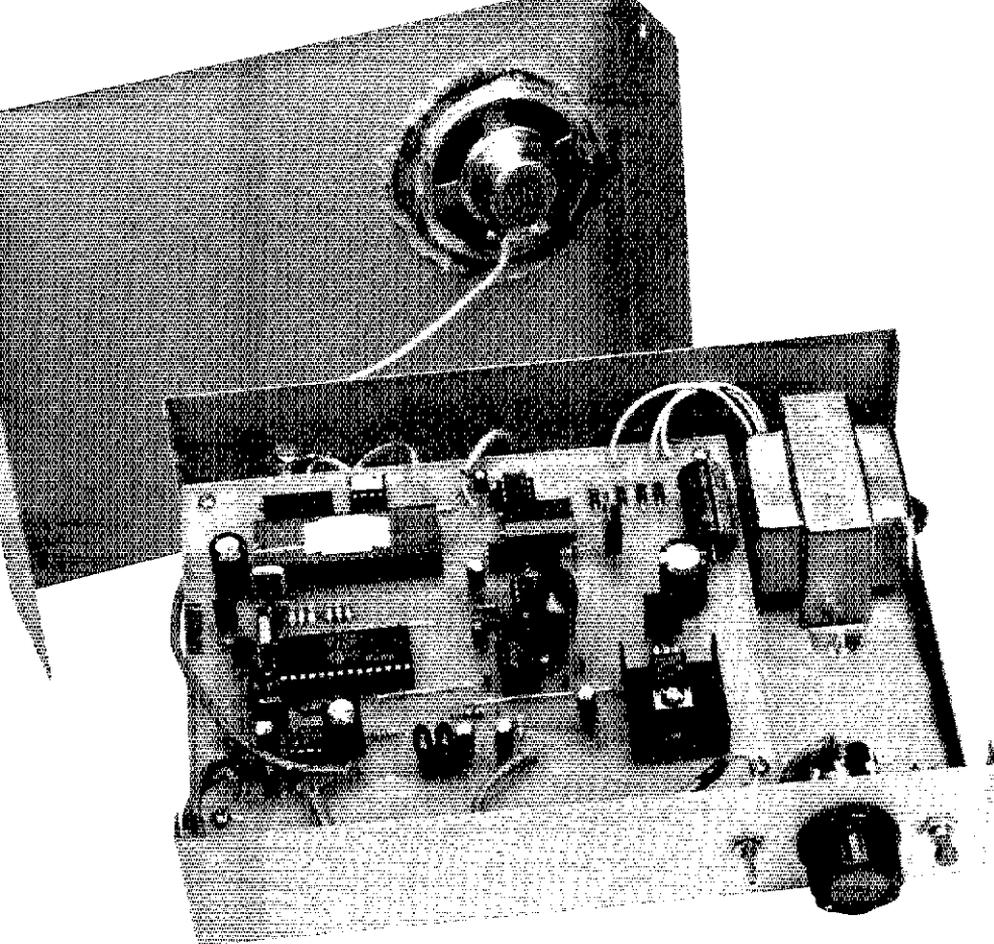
An inside view of the Orator. A Radio Shack enclosure (RS 270-272) houses the components. To avoid having machine-screw heads on the cabinet top, the speaker is held in place by a bead of silicone sealant. (If you follow this procedure, make sure the sealant you use does not contain acetic acid.) At the left foreground, you can see the speech processor chip. Immediately behind it is the 68701 microcomputer. The U8 and its heat sink are visible in the right foreground. Note that T1 fits snugly within the enclosure. If you use a power transformer other than the one specified in the parts list of Fig 5, make sure everything will fit within your chosen enclosure. This unit has no panel labels because it was built for use by a blind ham.
